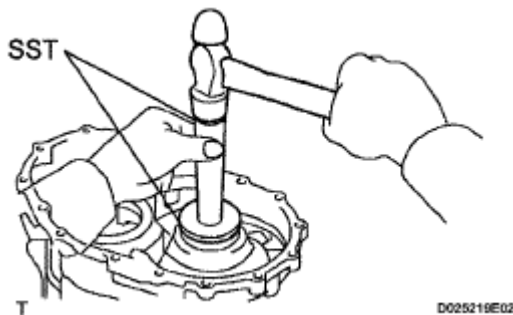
Installing Case Washer And Front Differential Case Tapered Roller Bearing Rear Outer Race To Transaxle Case
